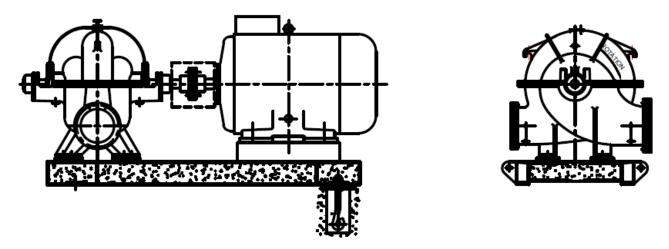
Foundation pump set (Page No. 17; Point no. 7.2.1)
